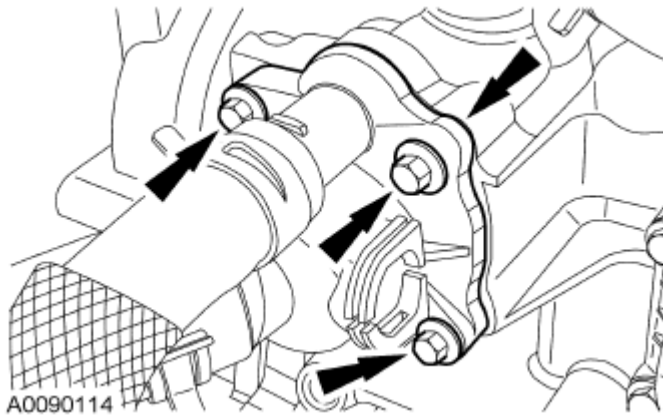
Locating Bolts And Thermostat Housing Assembly
